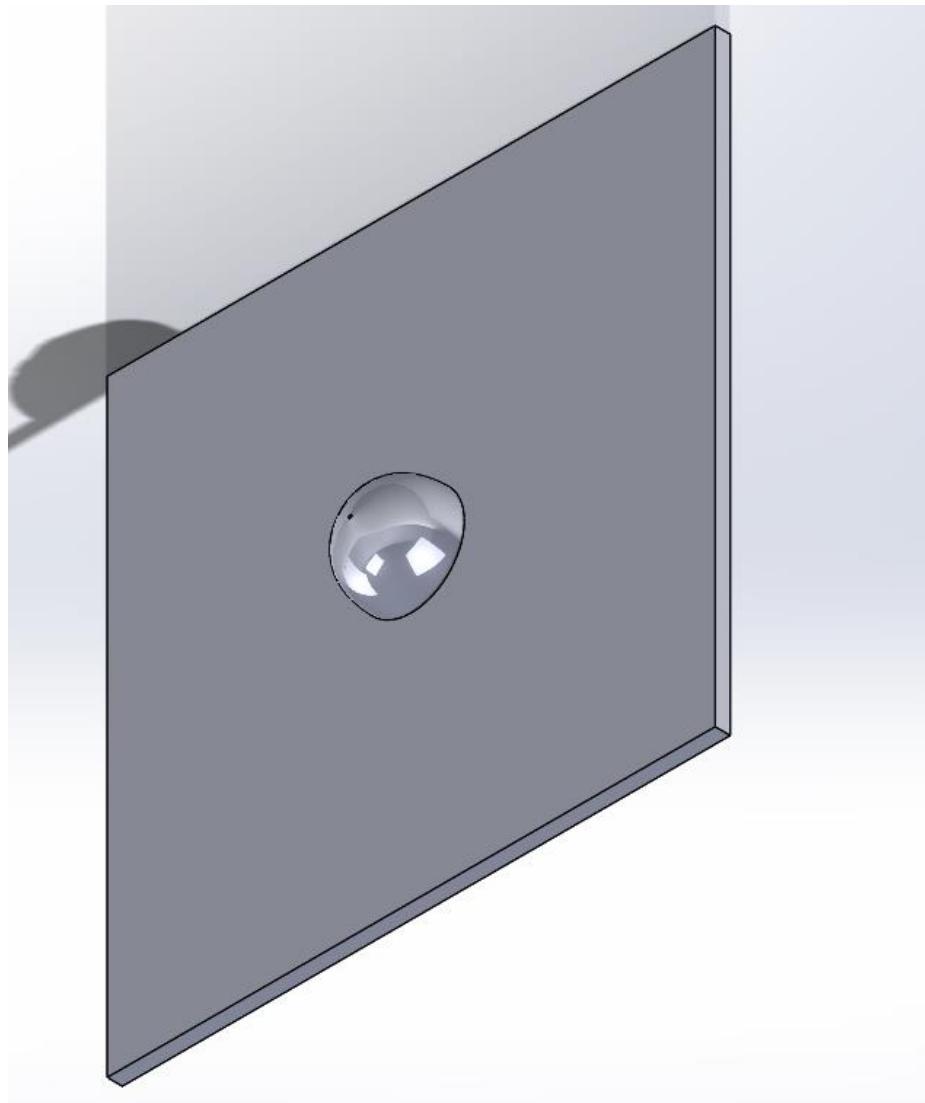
Part 1014 (Acrylic Sheet) CAD Drawing
